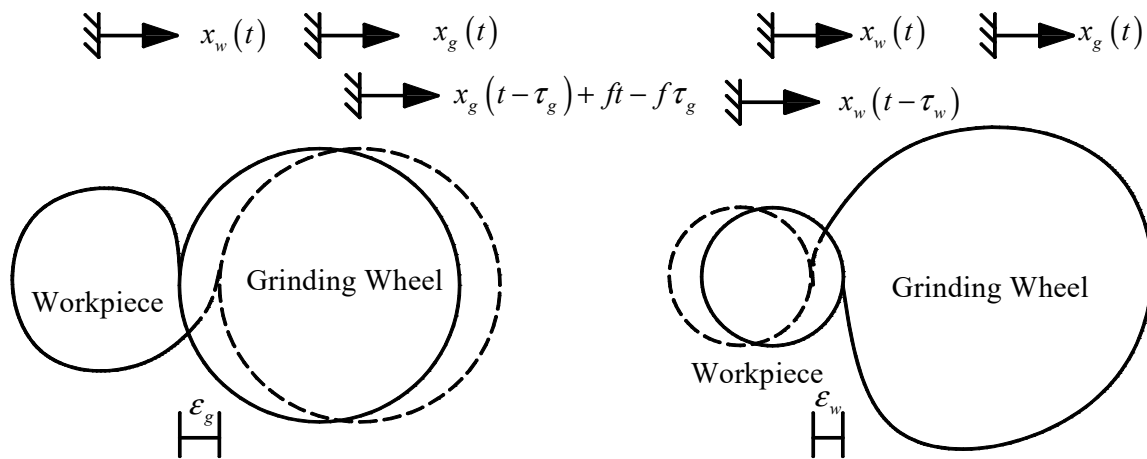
Regenerative effects on the surfaces of both the workpiece and the grinding wheel.
